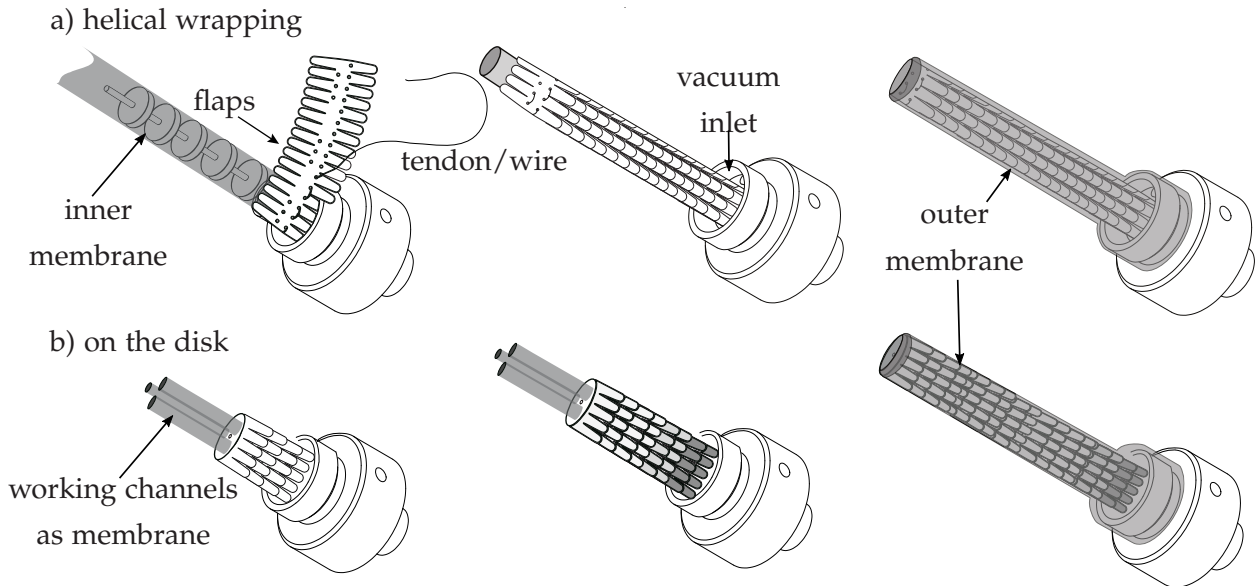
a) Helical wrapping layer jamming integration; b) Layer jamming integrated directly on a spacer disk.
